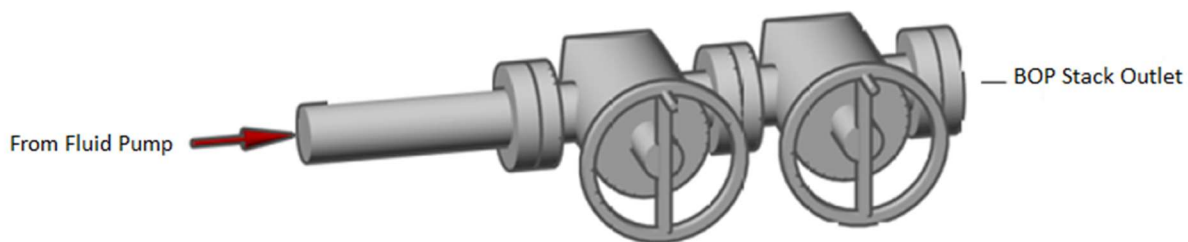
Example 5K RWP Choke Line and Choke Manifold
